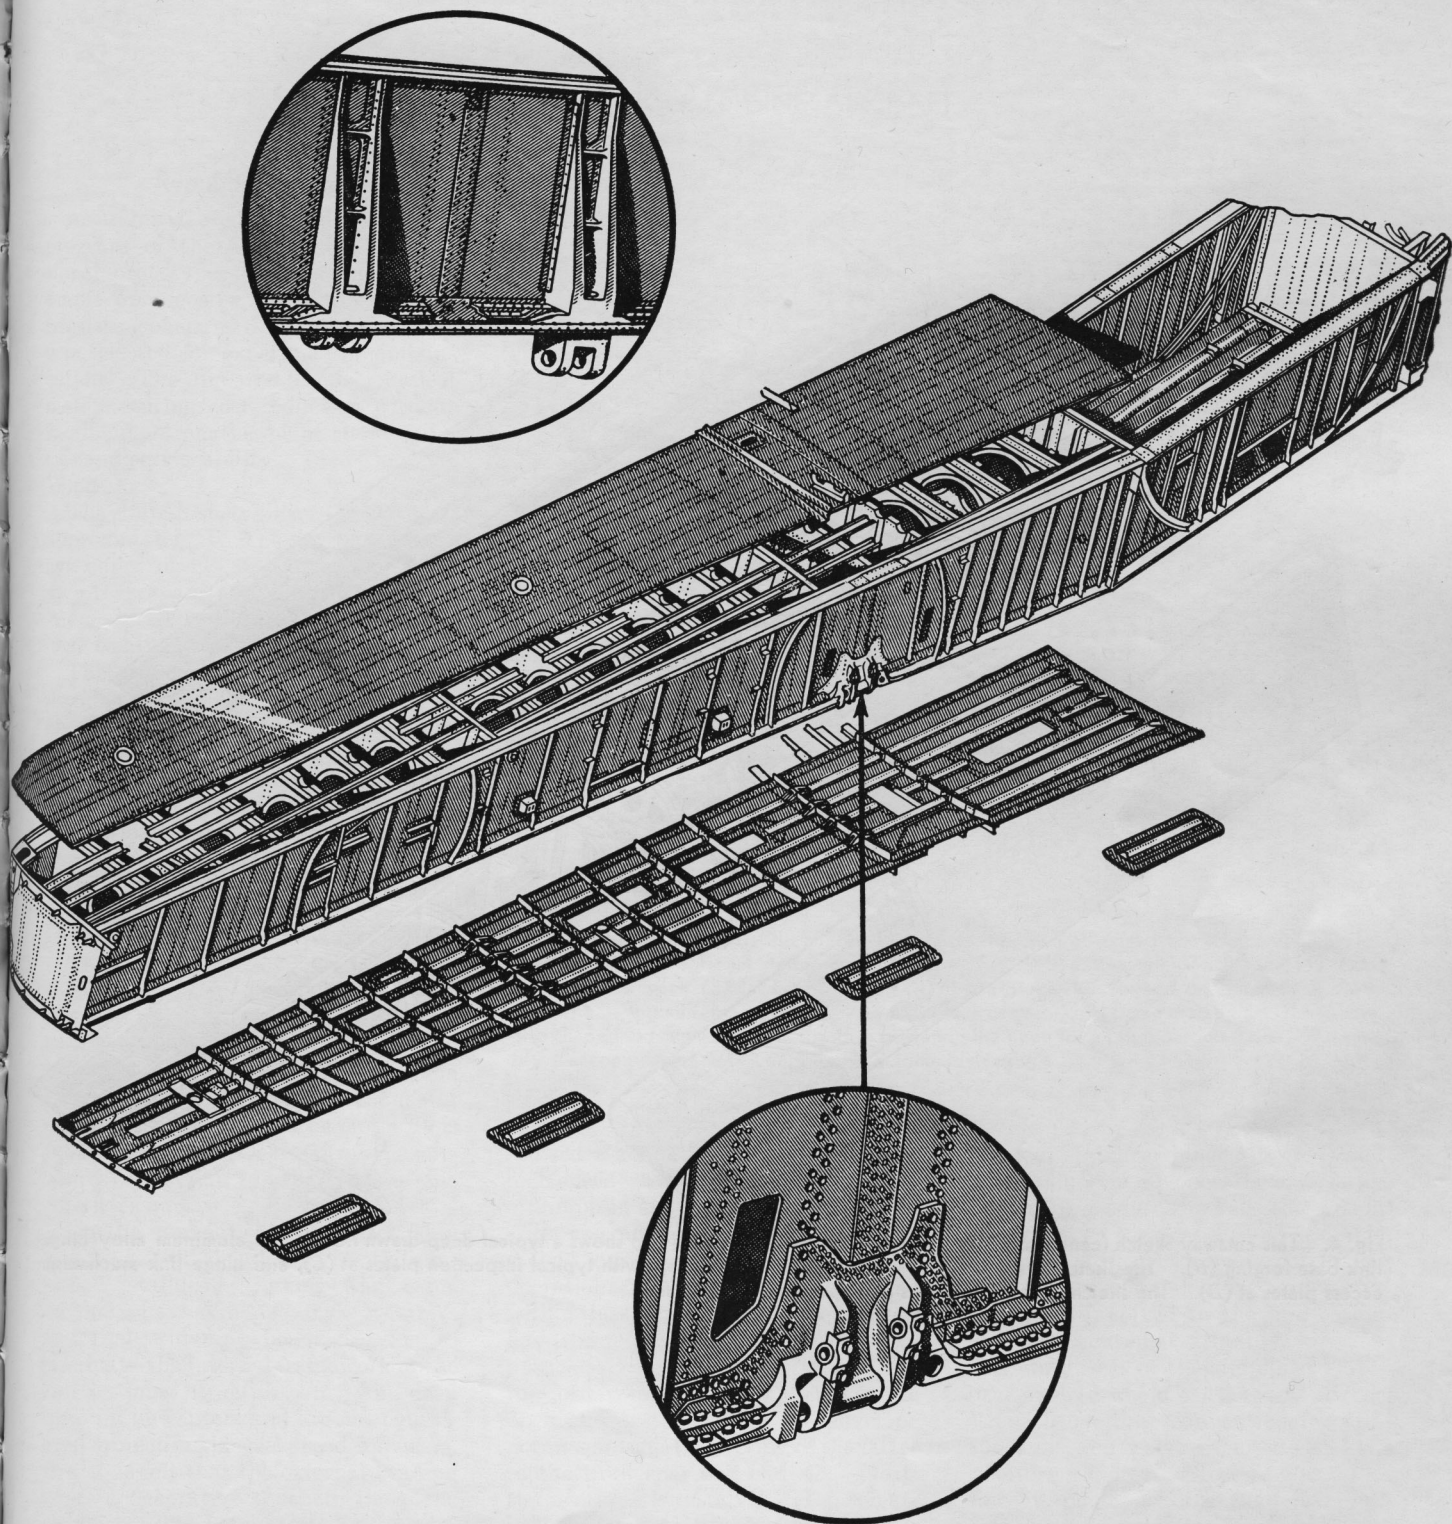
Center wing front section of the Douglas C-54 between the front and center spars, with the lower skin removed to show stringers, stiffeners, and inspection plates. The front spar landing gear fitting is shown enlarged in a circle at the bottom right, while the center spar landing gear fitting detail is circled at the top left.
